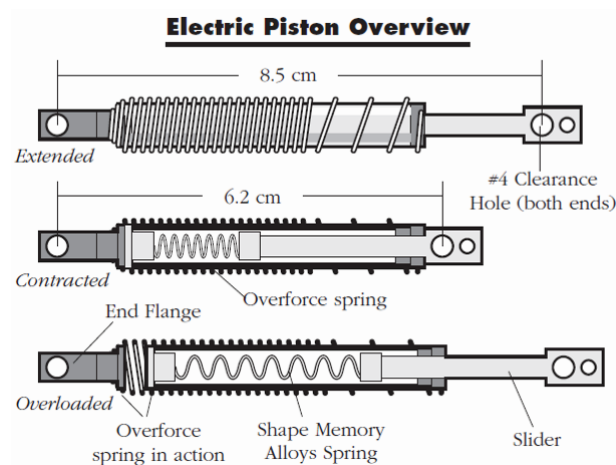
Electric piston sold by Mondo-tronics Inc. [158]
